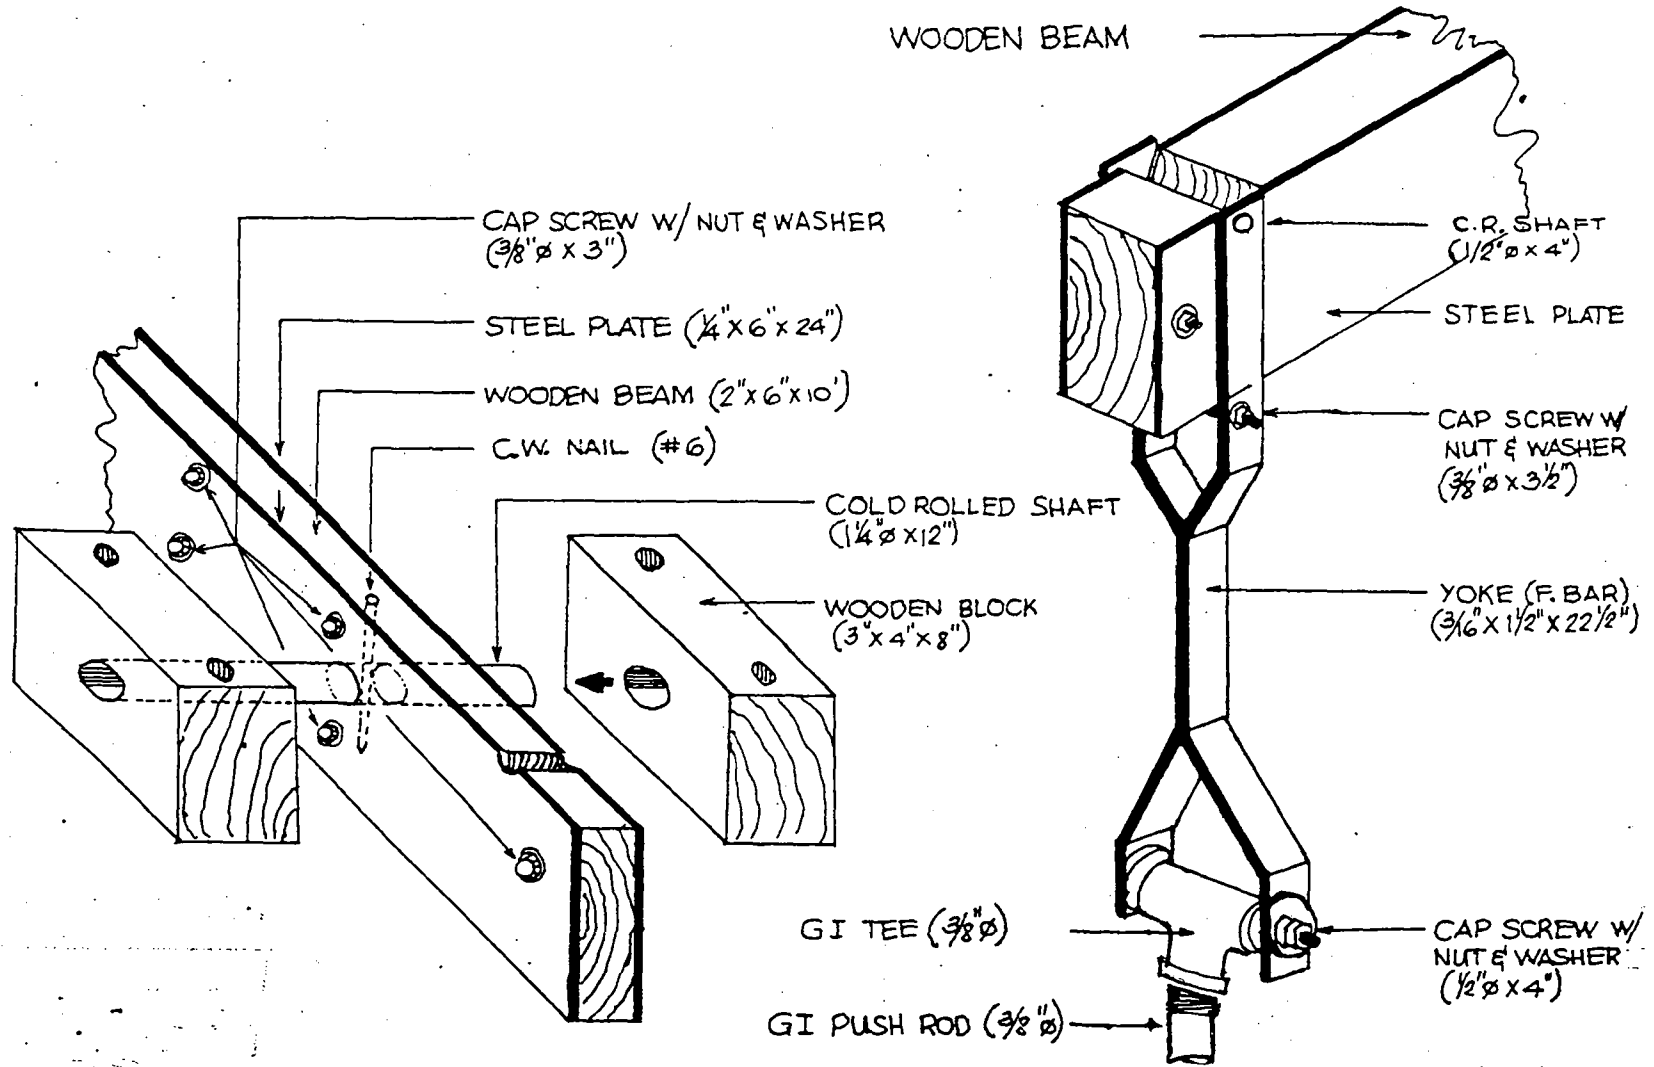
DETAILS OF BEAM, PIVOT & BEAM-YOKE PUSH ROD CONNECTION
